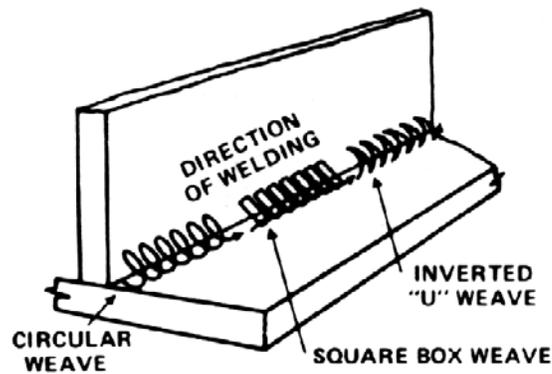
Tee Joint Fillet Weld Weave Patterns
